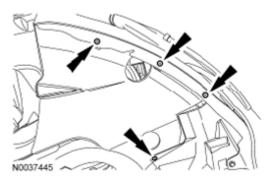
Locating RH Fender Splash Shield Mounting Screws Courtesy of FORD MOTOR CO.
